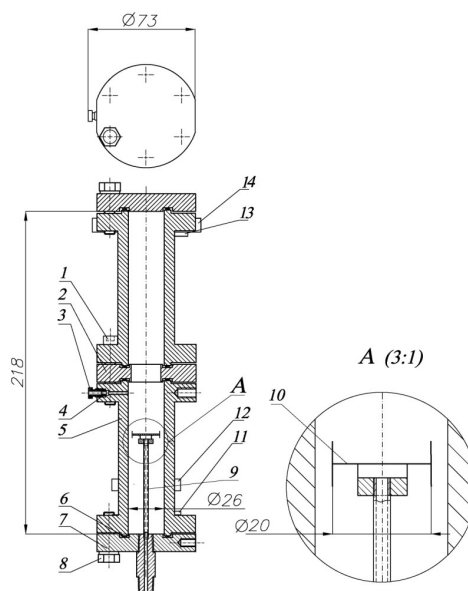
The layout of the reactor elements: 1. Bolt; 2. Middle flange; 3. Fitting; 4. Sealer; 5. Housing; 6. Filler; 7. Bottom flange; 8. Bolt; 9. Tube; 10. Intake; 11. Temperature sensor of the bottom flange; 12. Heating element of the bottom flange; 13. Temperature sensor of the upper flange; 14. Heating element of the upper flange
